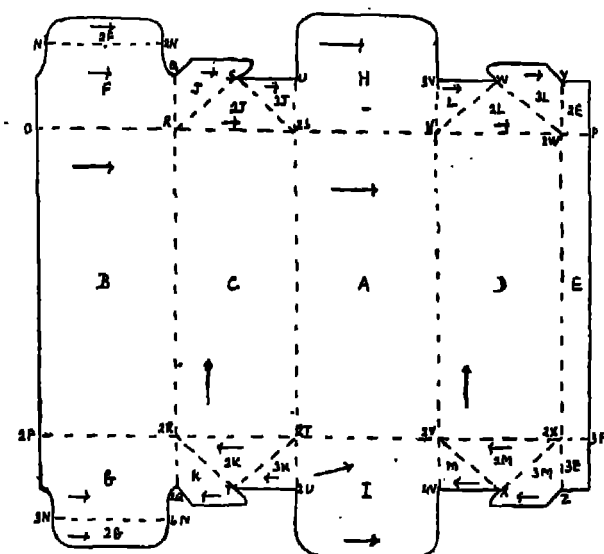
SINGLE-PIECE QUARTER-POUND TEA PACKET.
